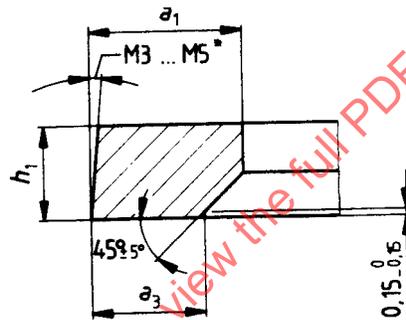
INTERNAL BEVEL BOTTOM SIDE (IFU)
